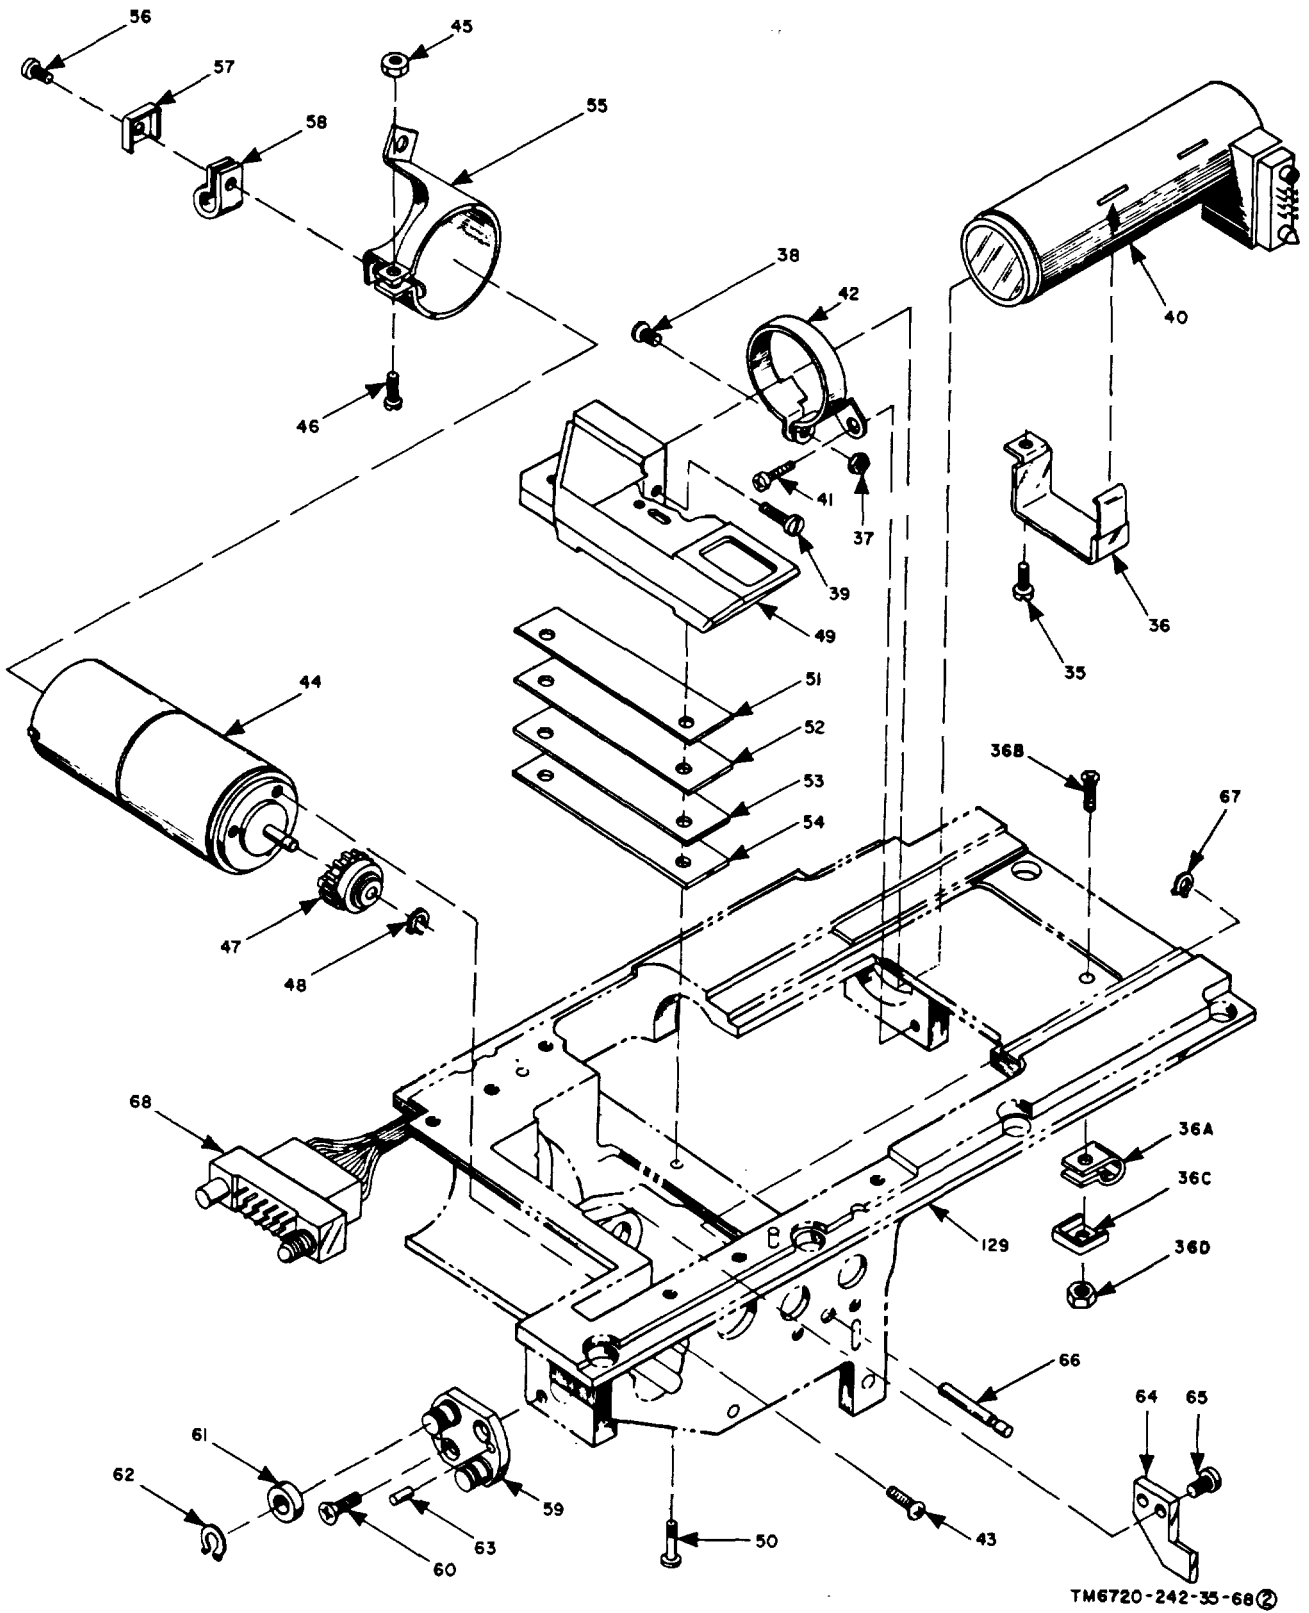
Aec assembly, exploded view (part 2 of 4).
